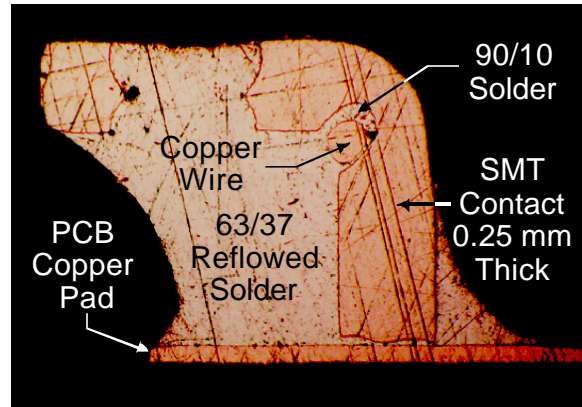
Electronic contact reflow soldered to printed circuit board using 63/37 tin/lead solder paste.
